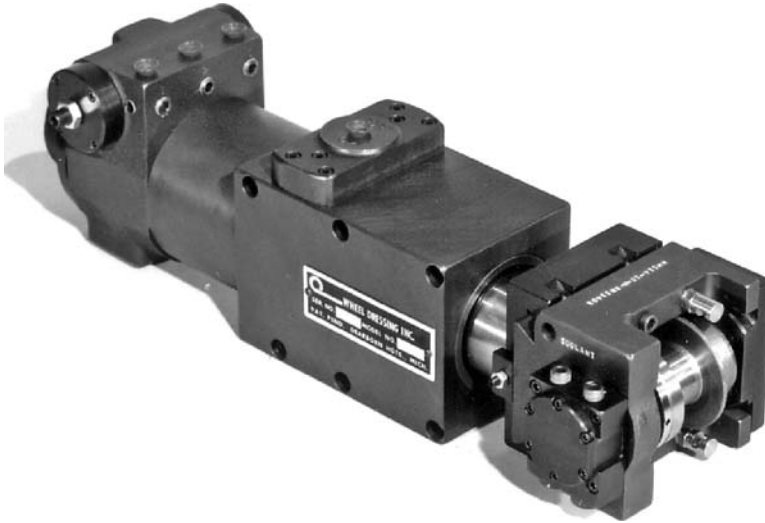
DC brushless servoelectric drive dresser spindle.
